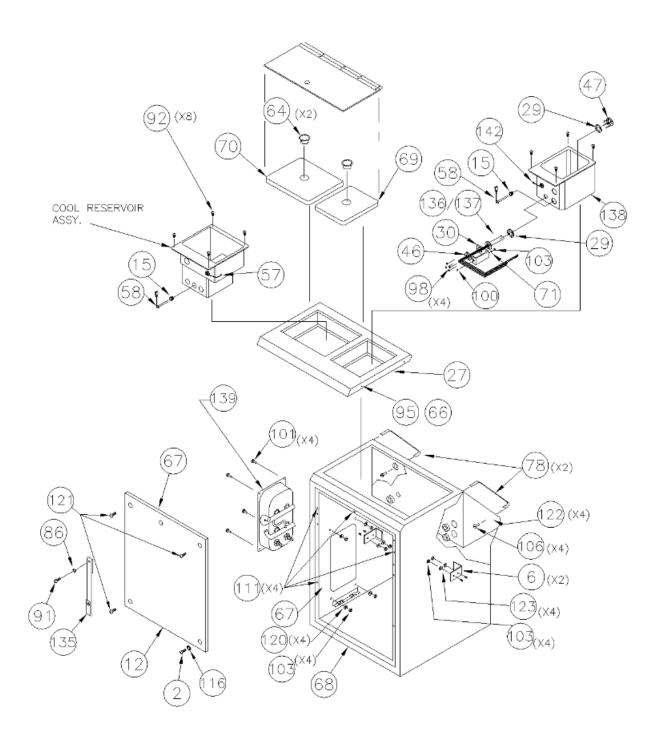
, BACK ASSEMBLIES AND PARTS
